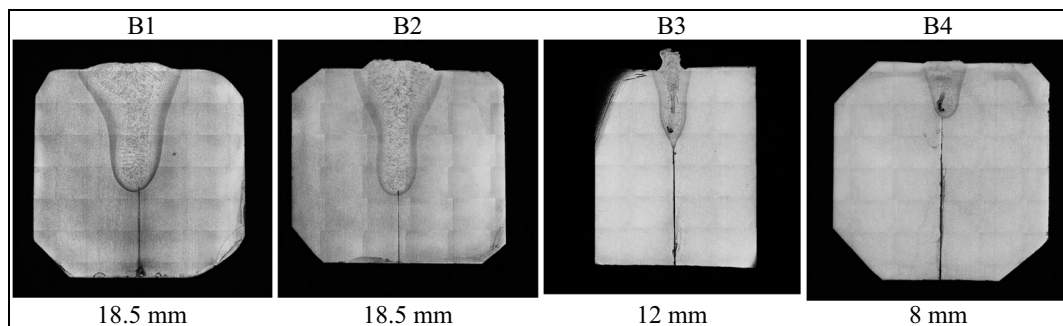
Weld macro-sections of butt joint plane sections and their corresponding penetration depths. For the flat position welds B1 and B2 deep penetrations were obtainable whereas the vertical welds B3 and B4 had insufficient penetration and welding defects.
